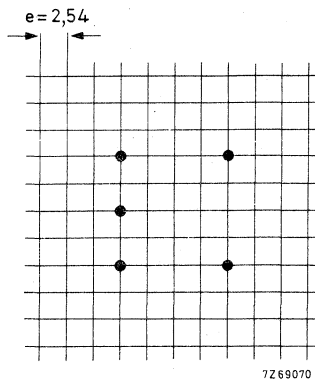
Hole pattern for mounting on a printed-wiring board, hole dia $1,3 \pm 0,1$ mm
